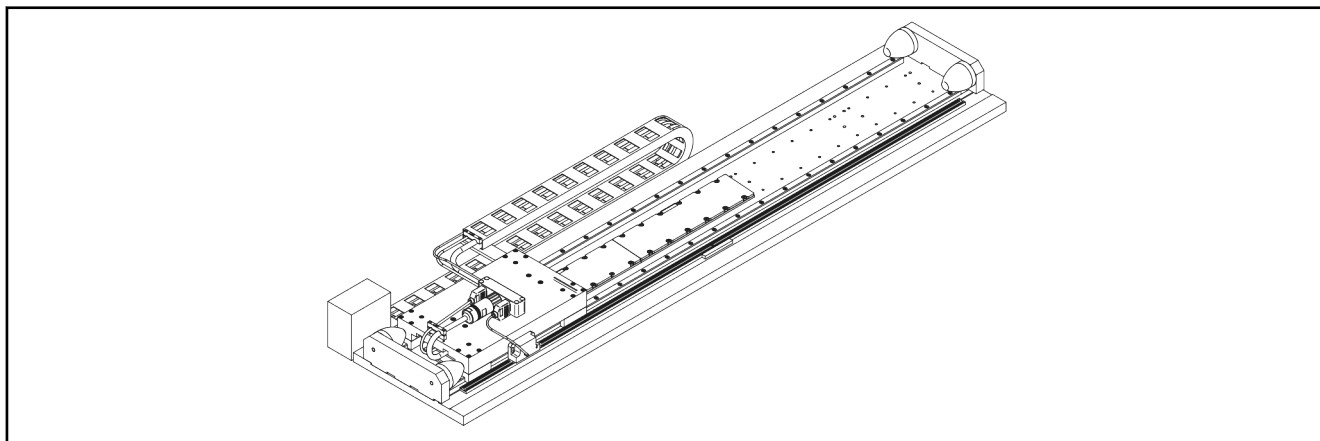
Mounting holes, dowel holes and reference marks at ML3S
